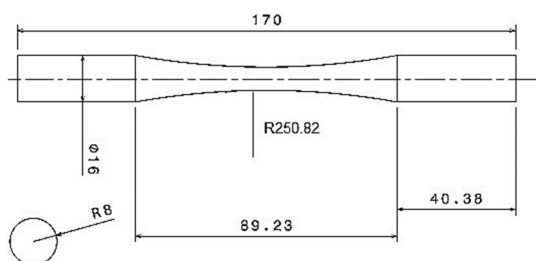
Geometry and dimensions (mm) of fatigue specimens
